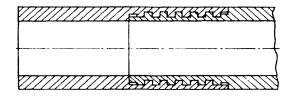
DRIVE CASING (DRIVE PIPE SCREWED FLUSH BUTT WITH SQUARE FORM THREADS PARALLEL SCREWING)
